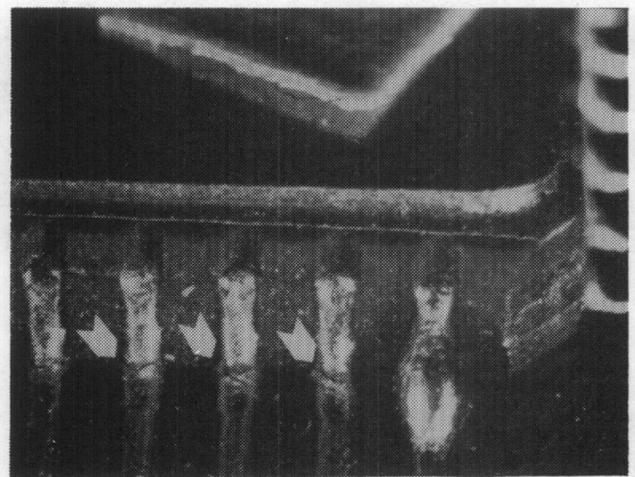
Noncracked Solder Joints on 24-Pin LCC
